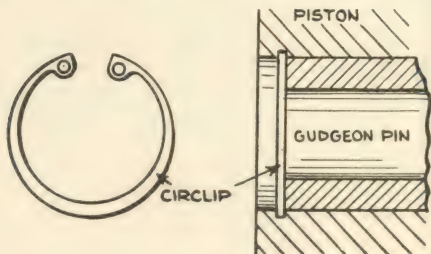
LOCKING GUDGEON PIN WITH CIRCLIP
